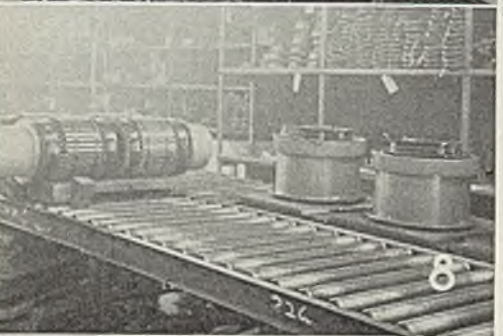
Here two roller conveyors carry finished parts from stock room to assembly conveyors
